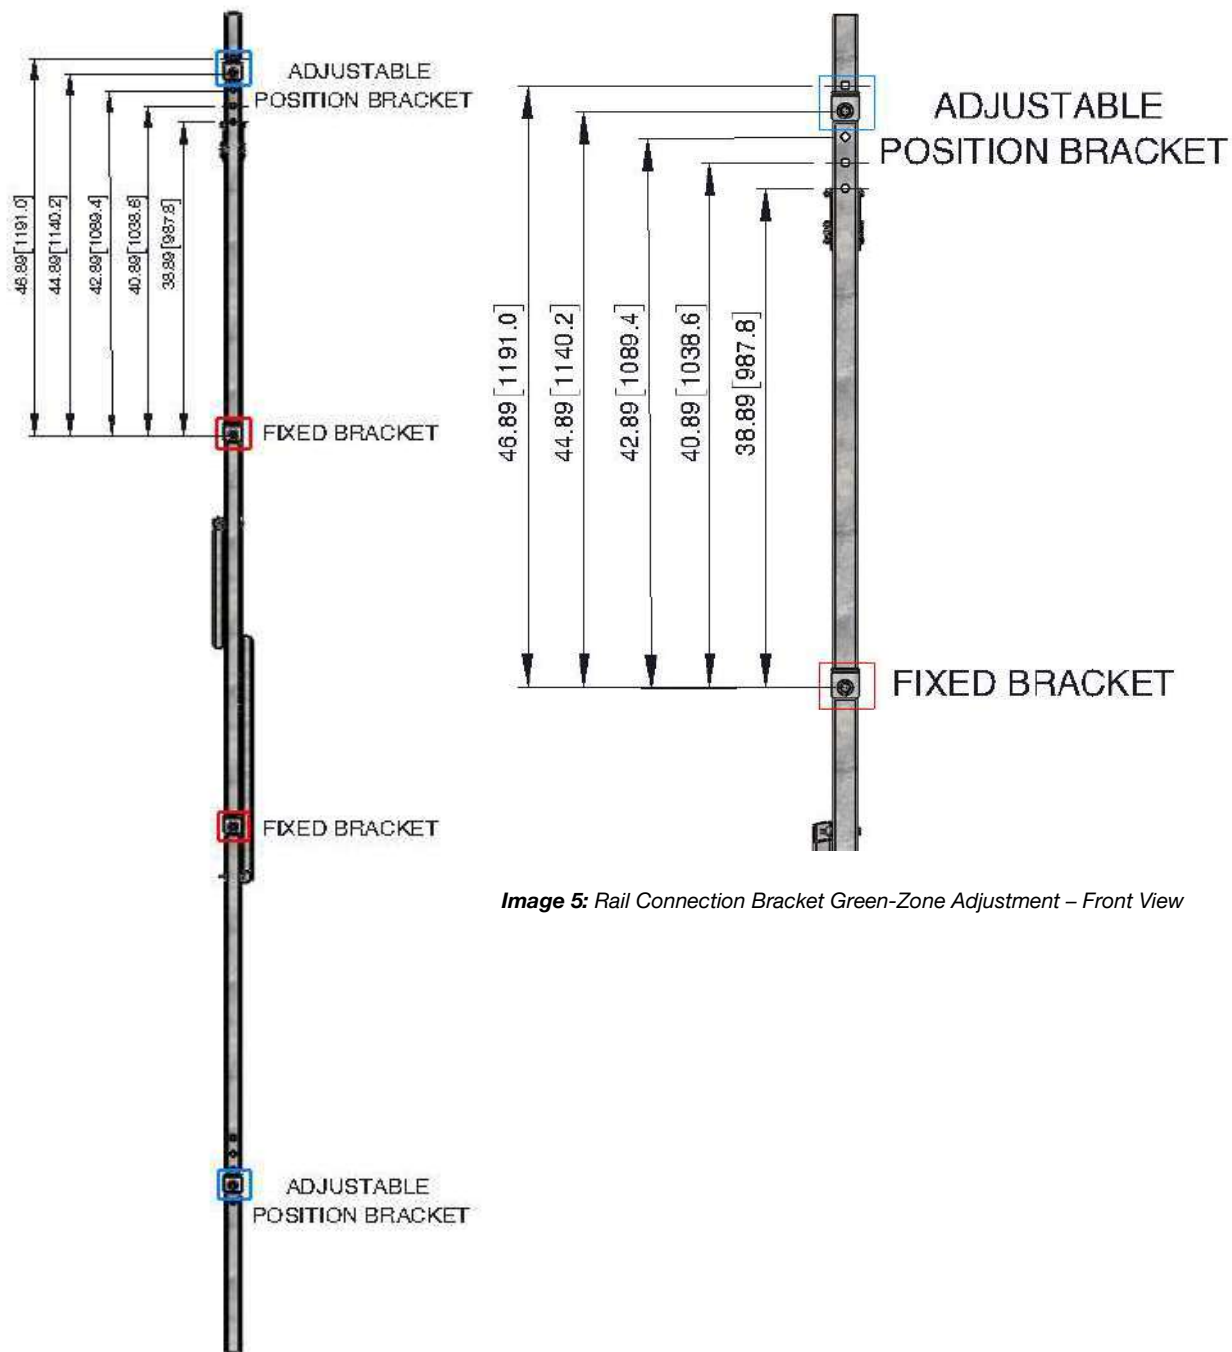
Rail Connection Bracket Green-Zone Adjustment – Front View
